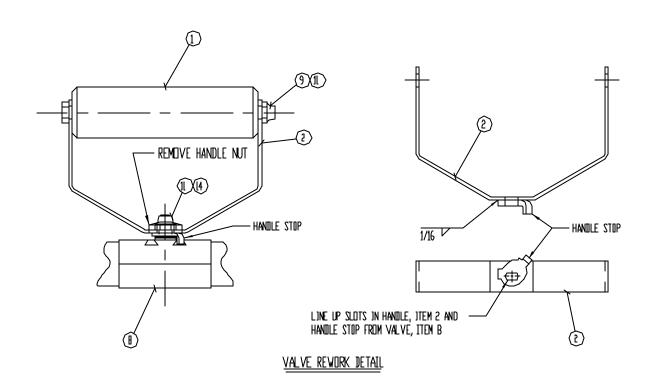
HANDSPRAY WAND ASSEMBLY (SHEET 1 OF 2)
